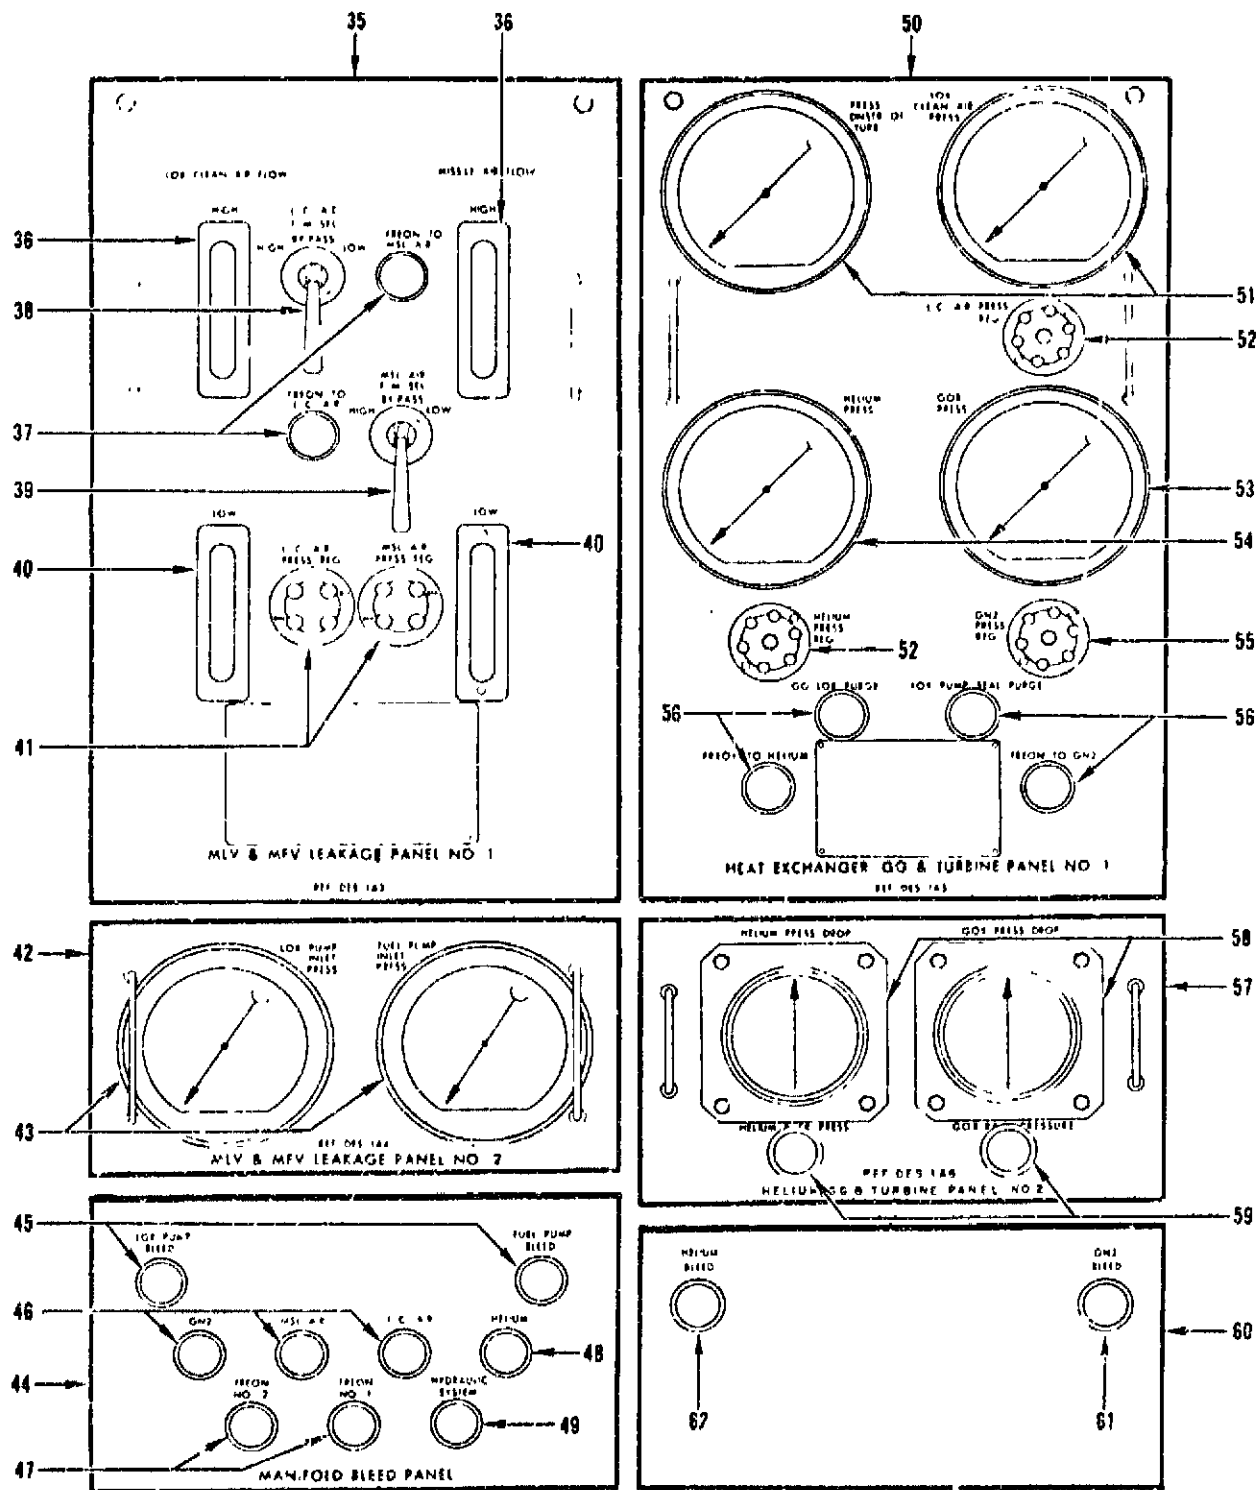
Disassembly of Engine Checkout Console (Sheet 2 of 20)
